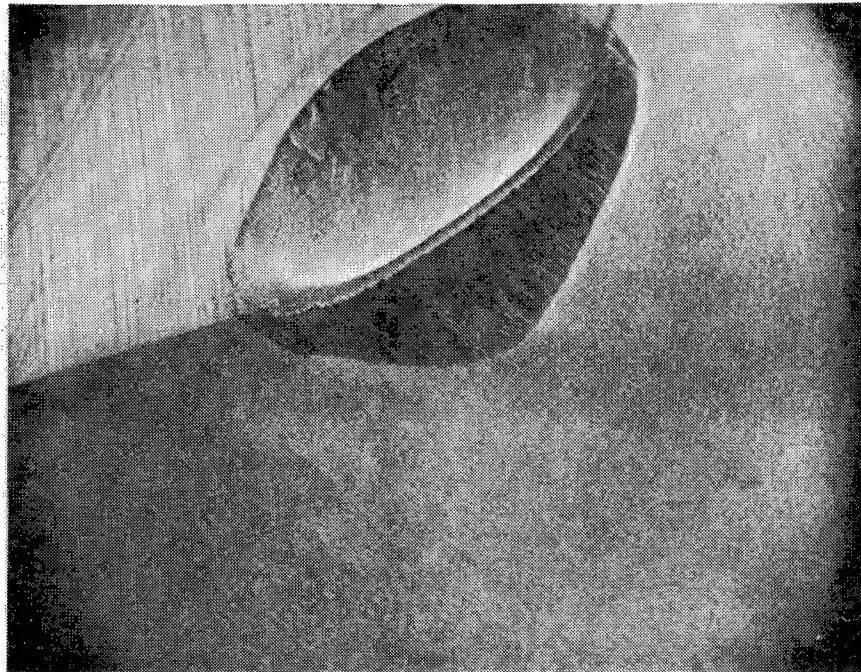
Photograph of a Typical Turning Test Tool for Fluid #15.
